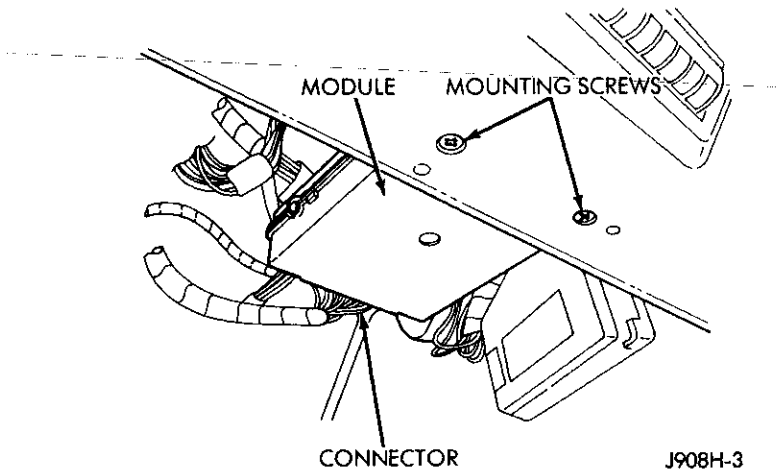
Under Dashboard On Drivers Side — XJ and MJ
